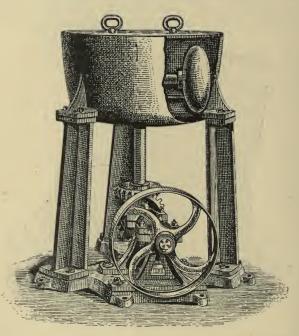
Pemsel's Oval Crushing Mill for Coring Mixture.
